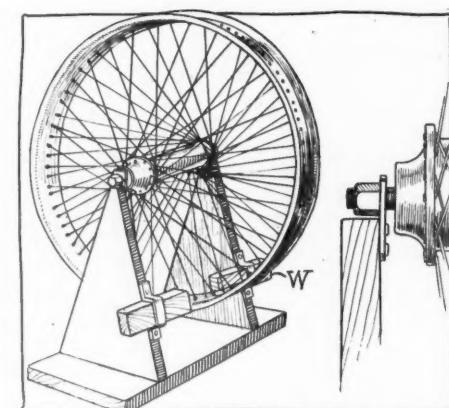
FRAME FOR TRUING UP WIRE WHEELS
